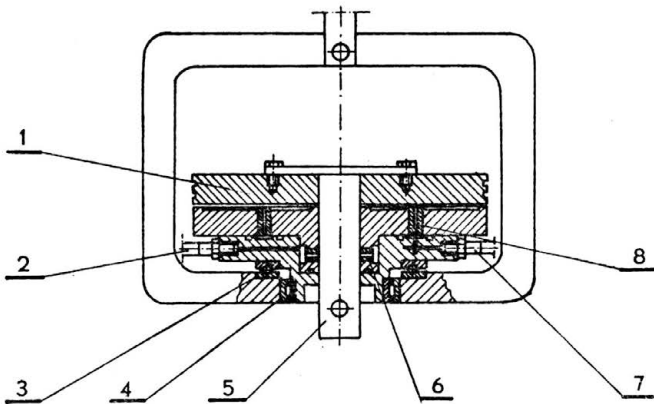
Air bearing: 1—torque disc, 2, 7—air inlets, 3—ball bearing, 4—roller bearing, 5—torque disc shaft, 6, 8—air nozzles.
